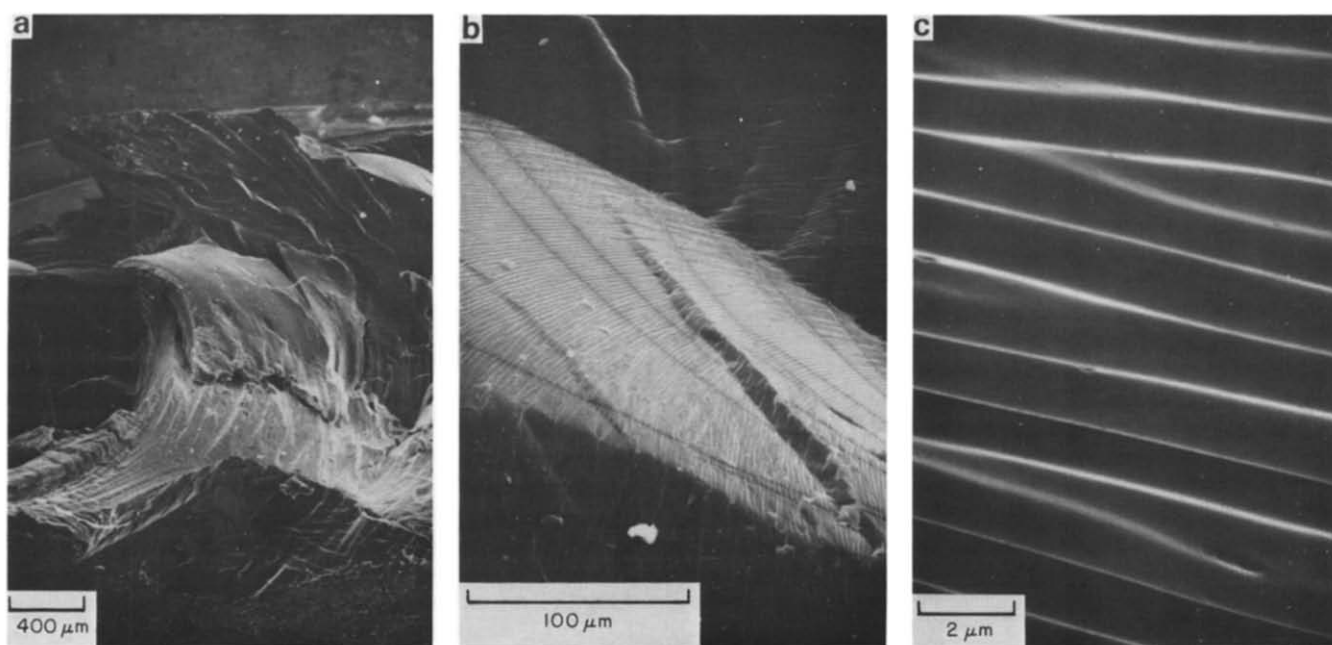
(a) Fracture surface markings near outer edge of compression test piece. (b) Fracture surface markings for central region, crystallized under hydrostatic compression. (c) Magnified view of central planes of 'platelets'
